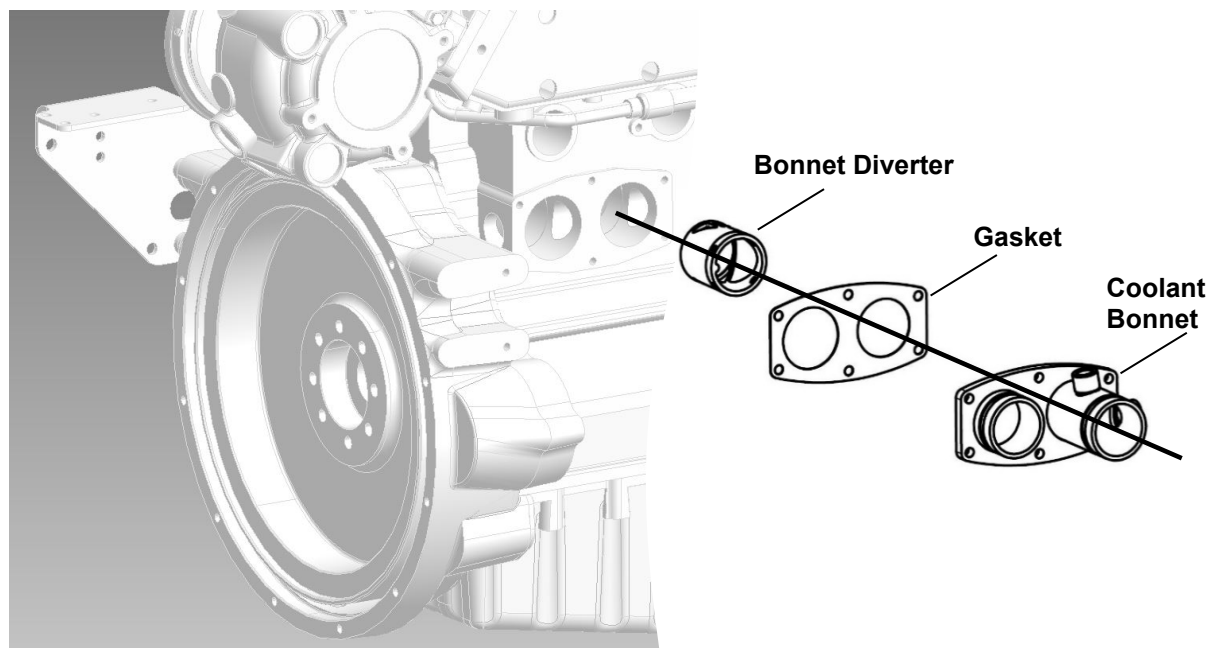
Coolant Bonnet, Gasket and Bonnet Diverter Installation
